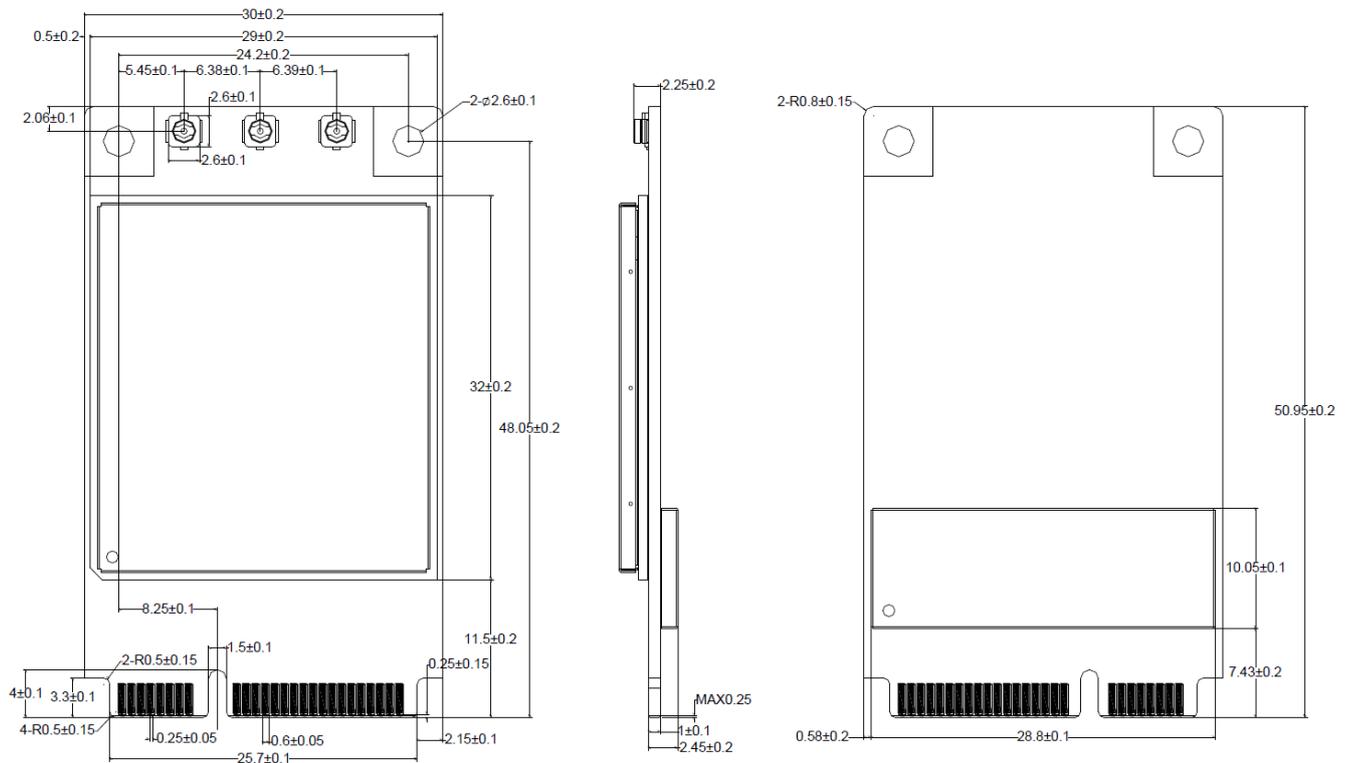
Mechanical Dimensions of EG25-G Mini PCIe
